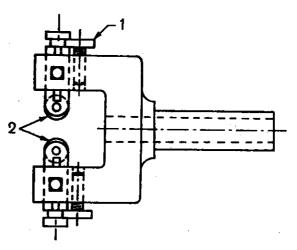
Knurling tool holder 1. Adjustable screw, 2. Knurls.
